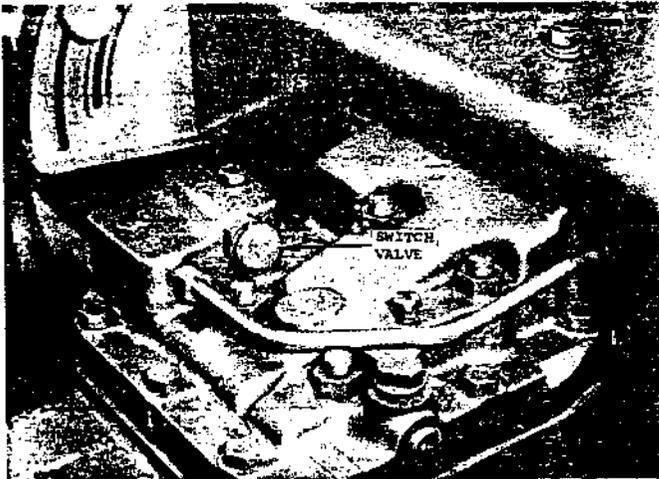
Combining Valve Installed — MF 175 Tractor
